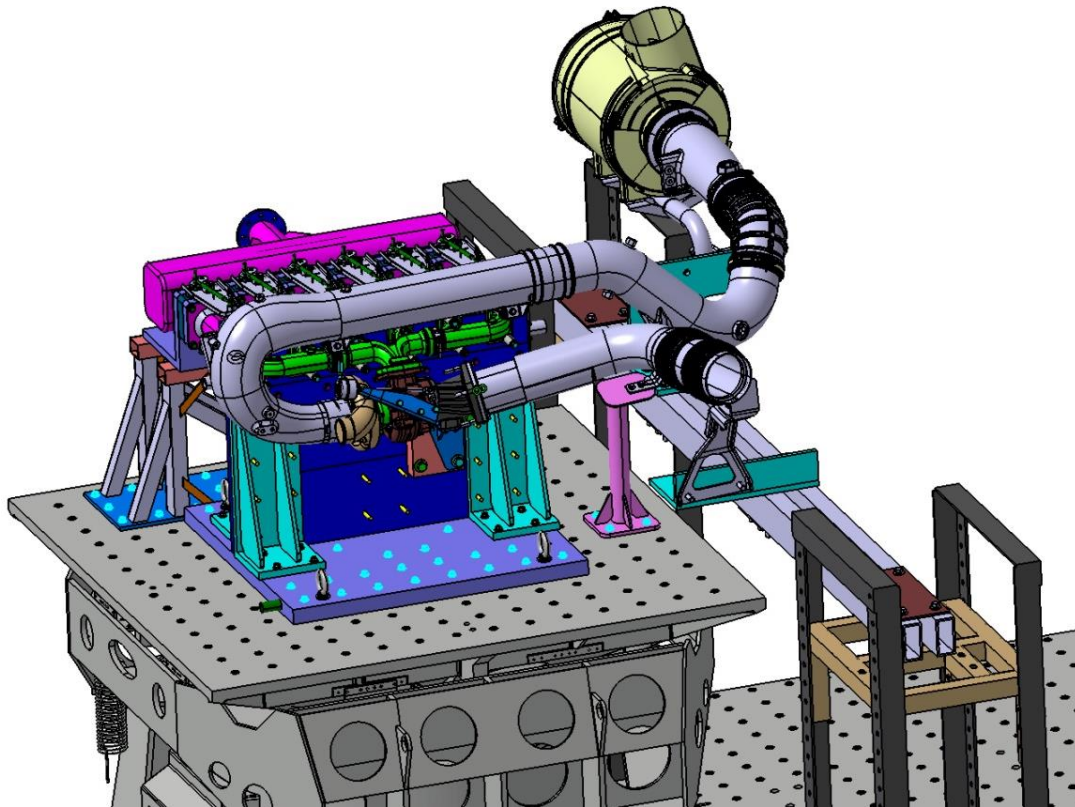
Main parts of exhaust manifold TMF test rig design.
